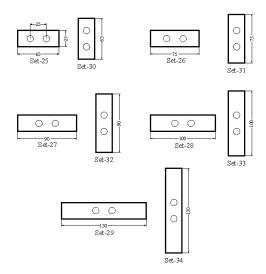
Specimen set numbers and rail cross sections when dowel spacing was 25 mm constant and rail depth was varied (dimensions mm)
